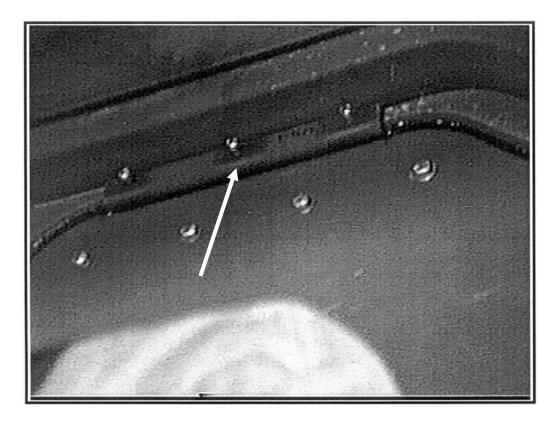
Slide the Mounting Armor Brackets over the rear cab window opening edges.
